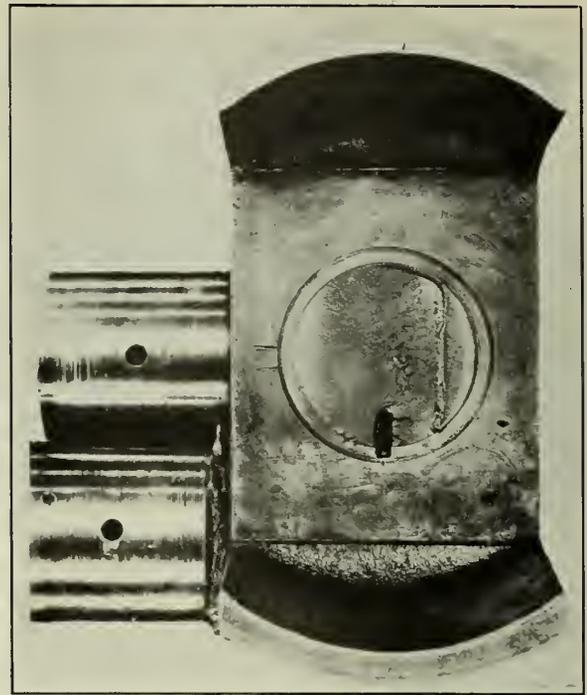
Score Marks Causing Failure in Stationary Engine Crosshead.
